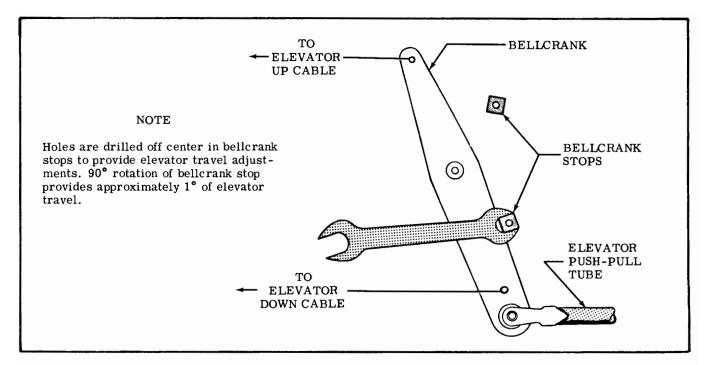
Elevator Bellcrank Travel Stop Adjustment
